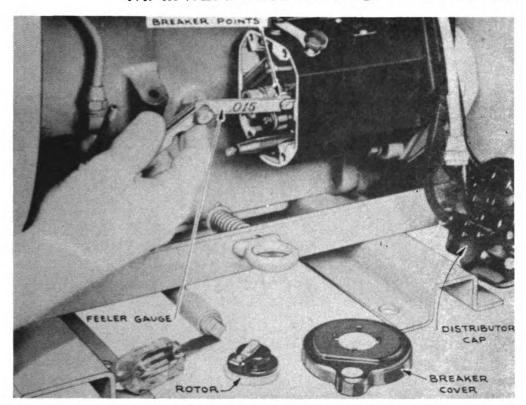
CHECKING MAGNETO POINT CLEARANCE
